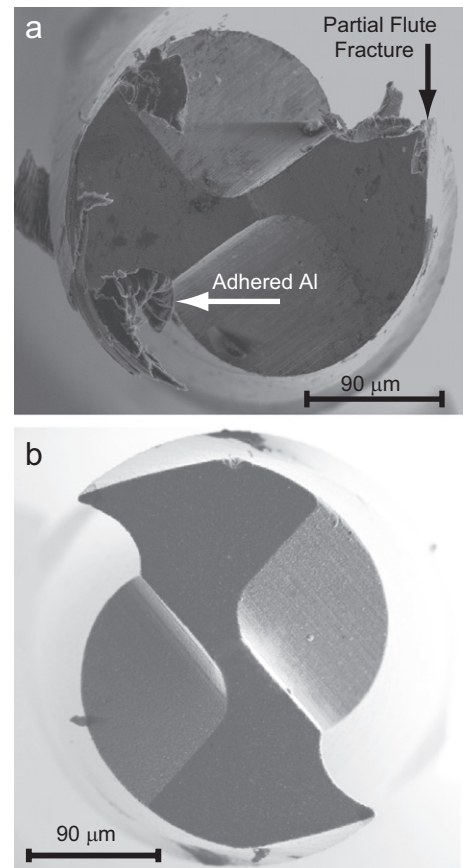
SEM images representative of tool condition after machining: (a) uncoated tool showing adhesion of Al and partial tool fracture and (b) diamond-coated tool showing no observable adhesion of Al or tool wear.
